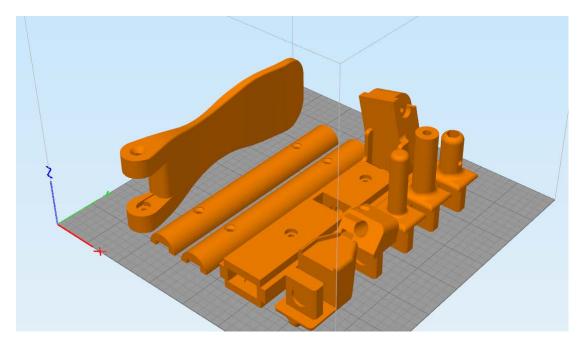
Print bed layout. An entire UHAT can be printed on a 7 inch square print bed.
